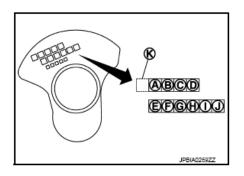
Identifying Crankshaft Pin Journal Diameter Grade Stamped On Crankshaft Courtesy of NISSAN NORTH AMERICA, INC.
